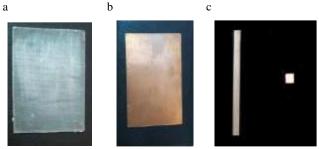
(a) Zinc workpiece; (b) Copper workpiece; (c) Stainless Steel tool with cross sectional view
